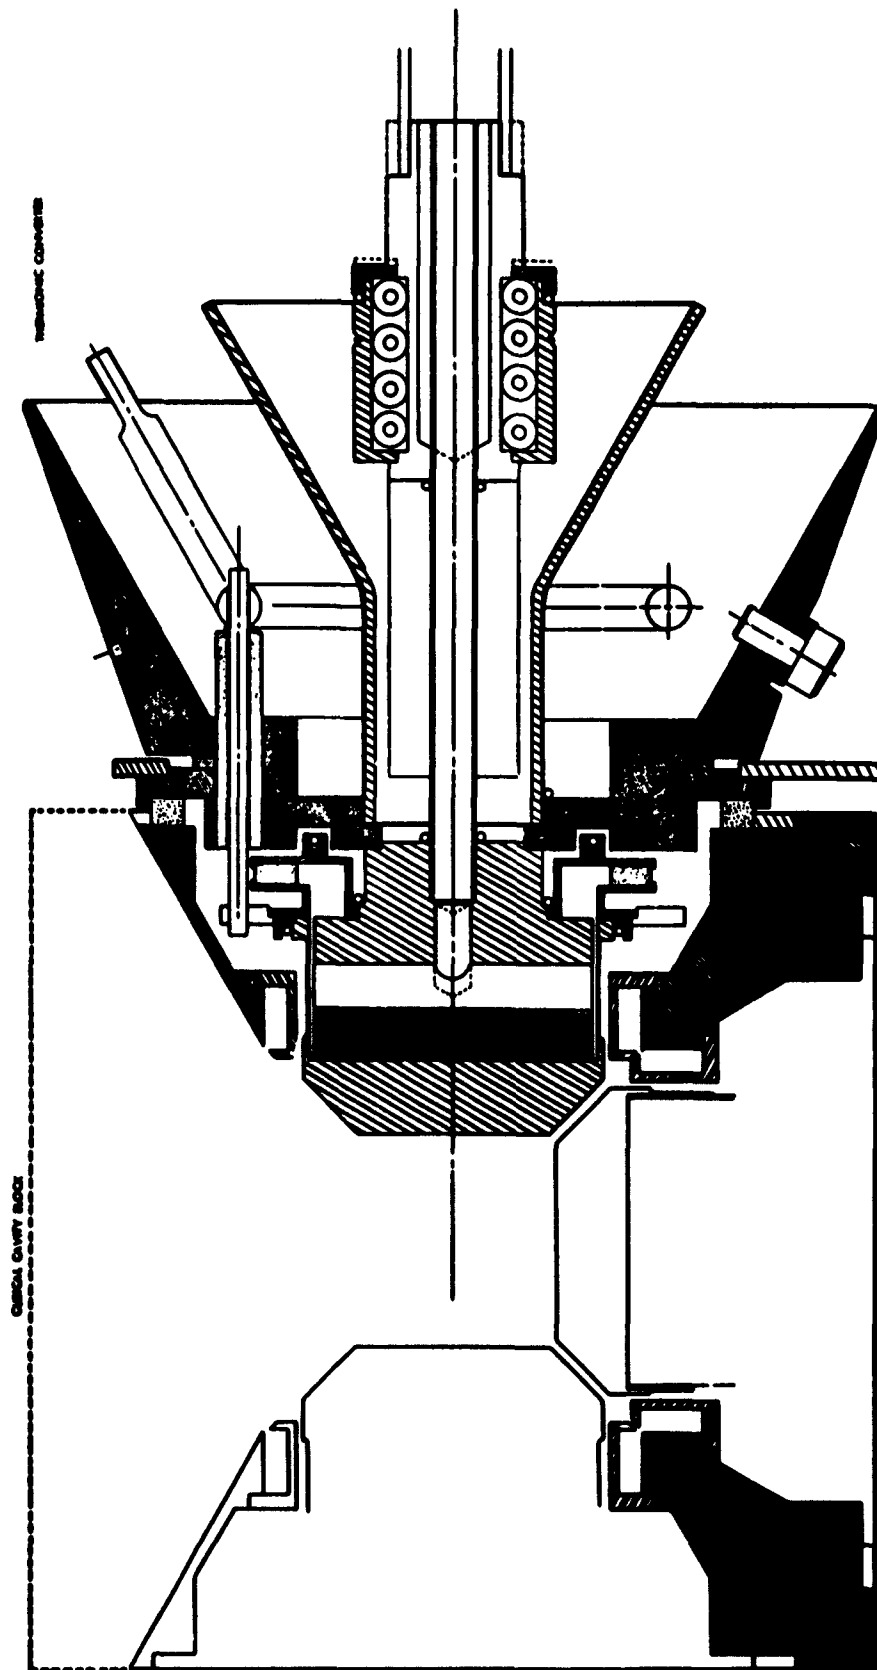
Thermionic Converter and Clinical Cavity Block Assembly
